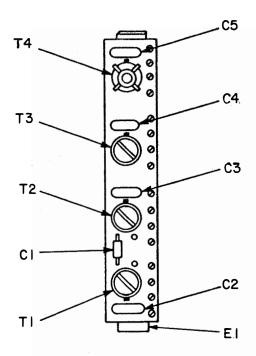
10 MHz Subassembly A2A4A28, Component Locations
